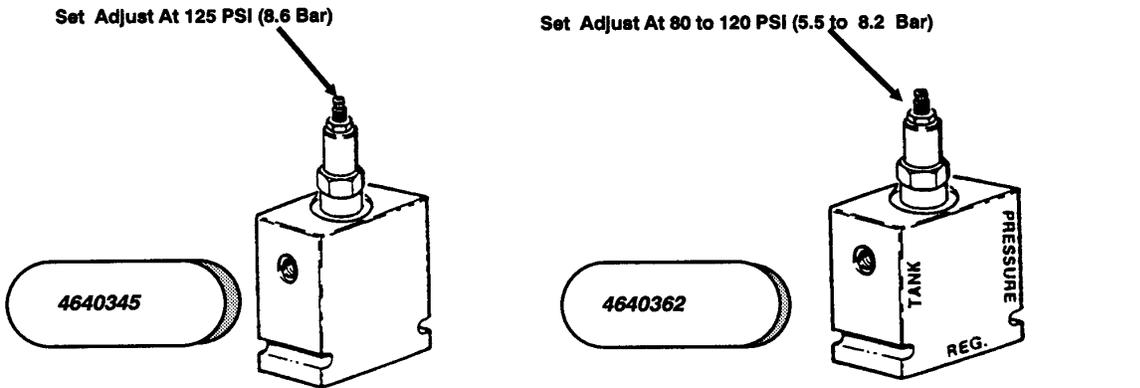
Vickers All Hydraulic Machines Pressure Settings (Sheet 3 of 4).
